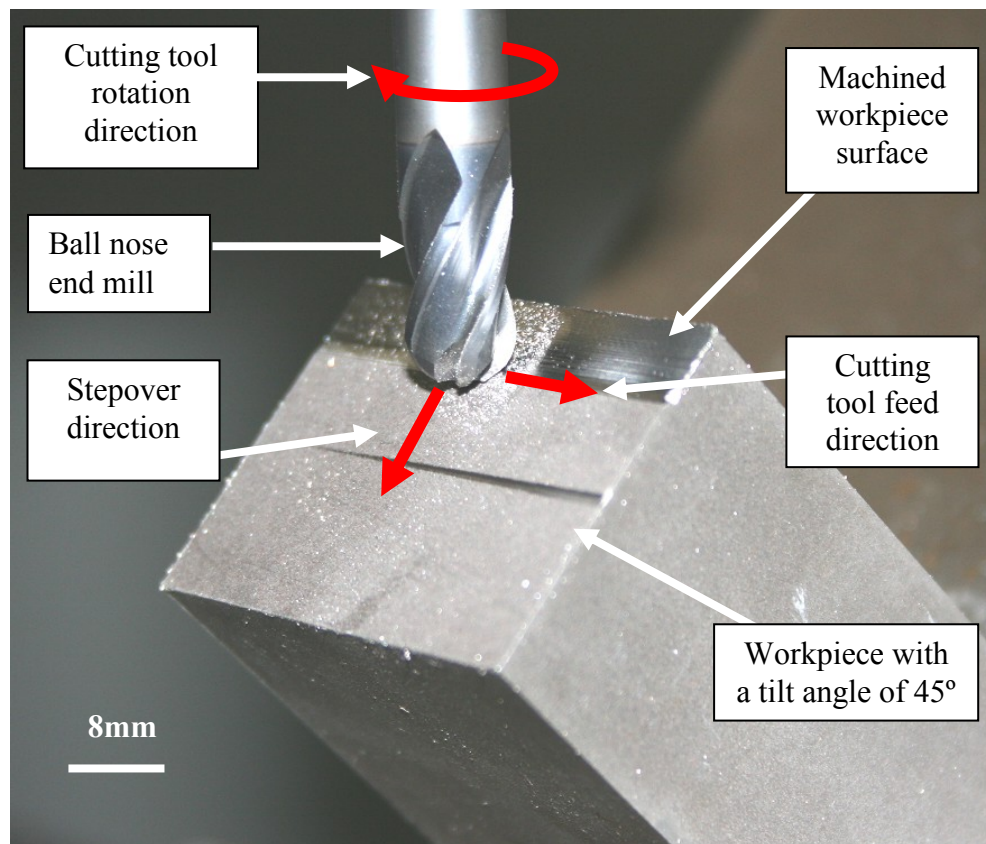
Schematic showing up milling in a horizontal downwards direction using a ball nose end milling and a workpiece tilt angle of 45°
